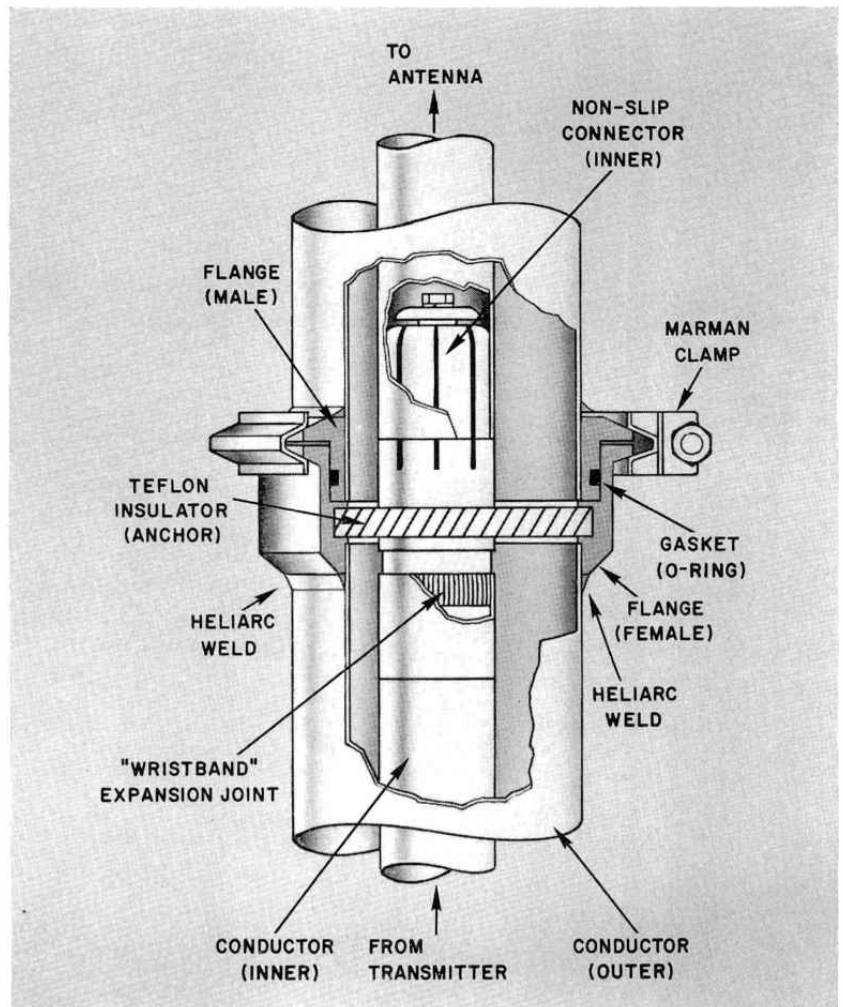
Universal transmission line coupling in cross-section. The "sexed" coupling prevents misalignment during installation and the fully-captive "O-ring" gasket assures a leakproof joint. Heliarc-welded flanges are superior in mechanical strength and electrical conductivity.
